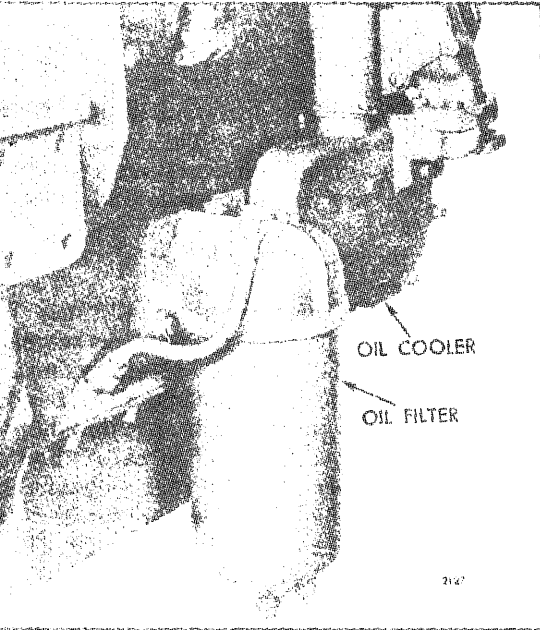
Typical In-Line Engine Oil Filter Mounting
